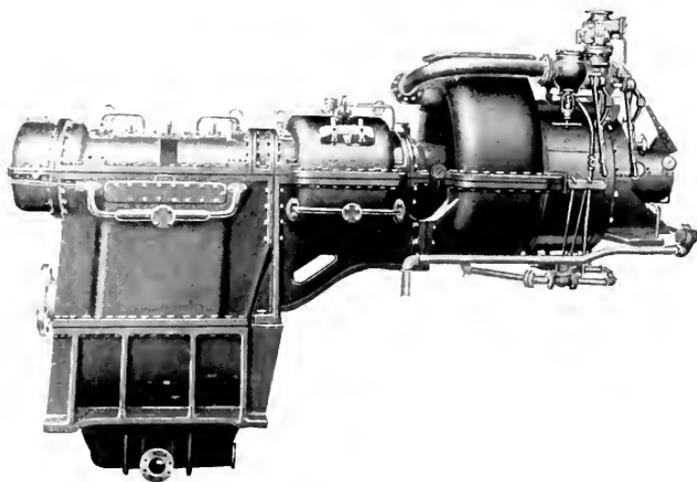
Two-plane Type Marine Geared Turbine—Starboard or Operating Side
